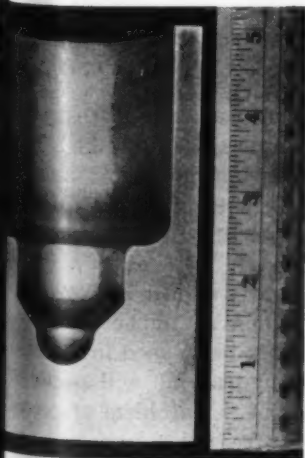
Shell body for Army Ordnance (axial section) cold forged from 14S. Part is produced from a solid cylinder
